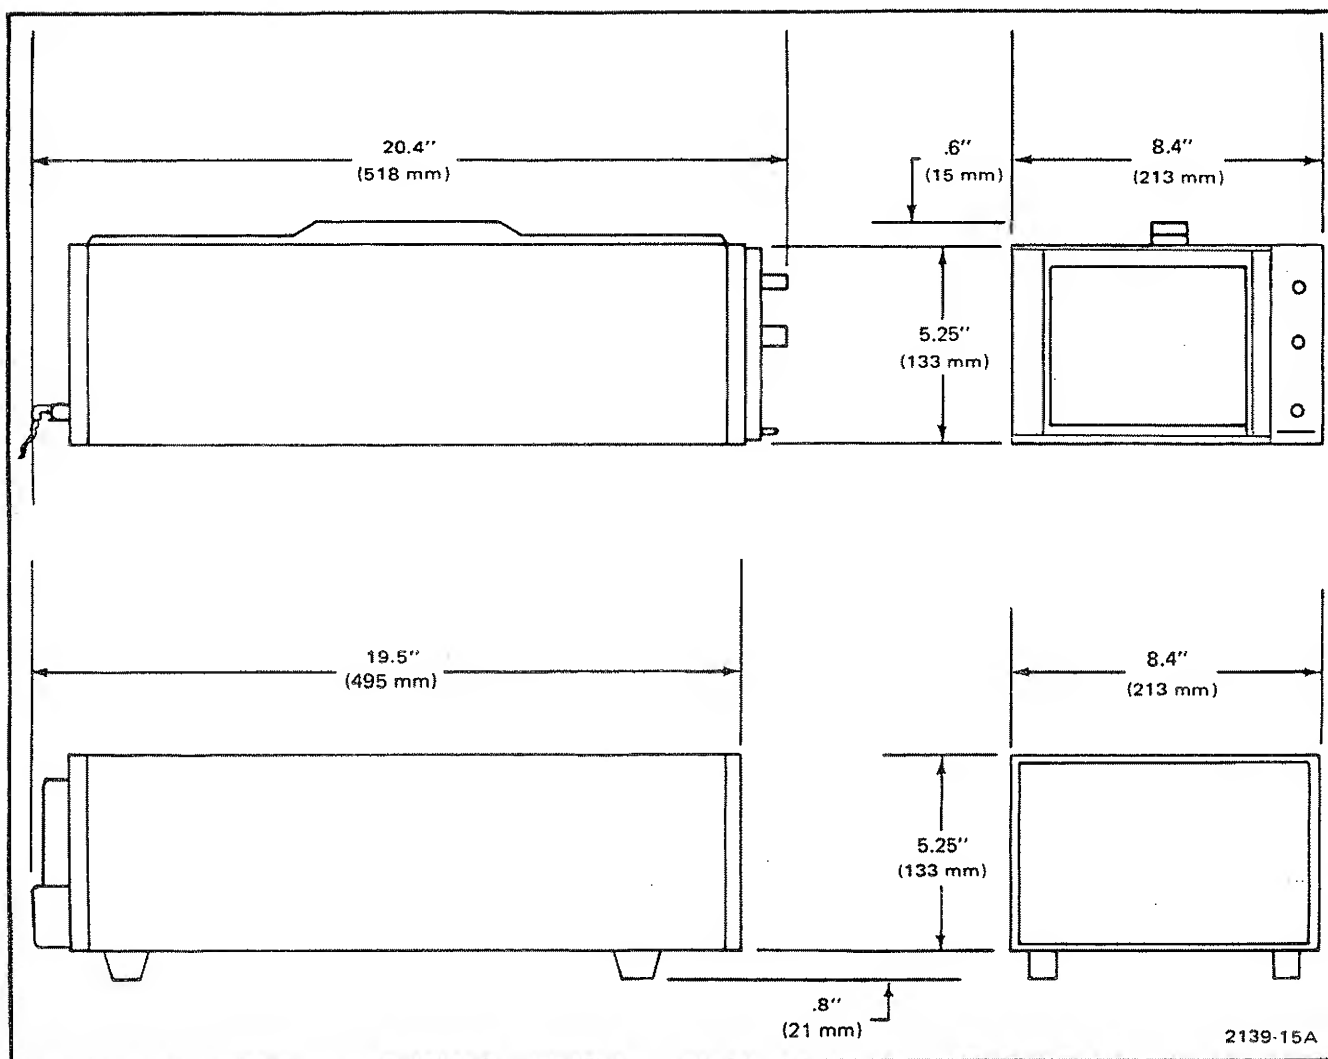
Illustration showing dimensions of the cabinet version of the 5440.
